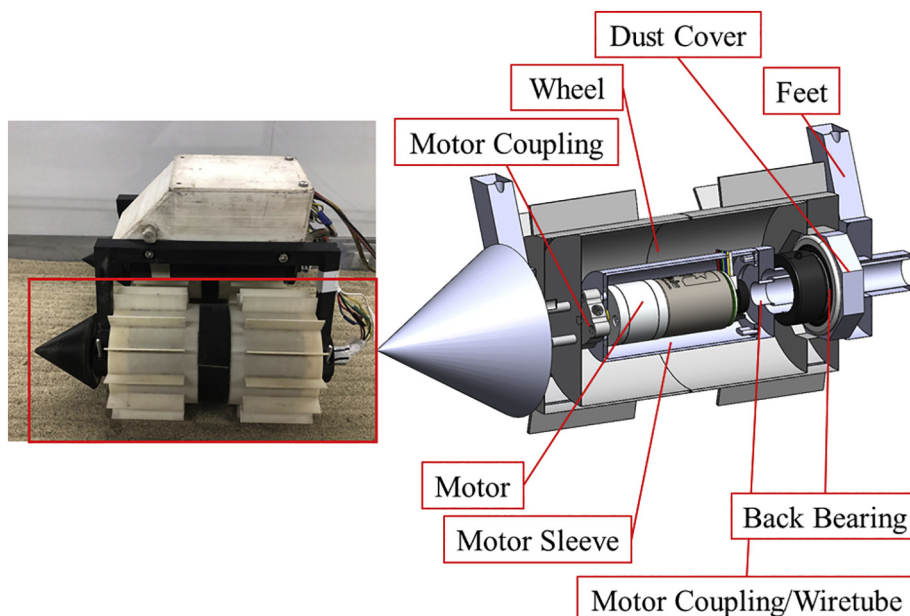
Experimental craft with internal cutaway in Solidworks illustrating the power transfer mechanisms.
